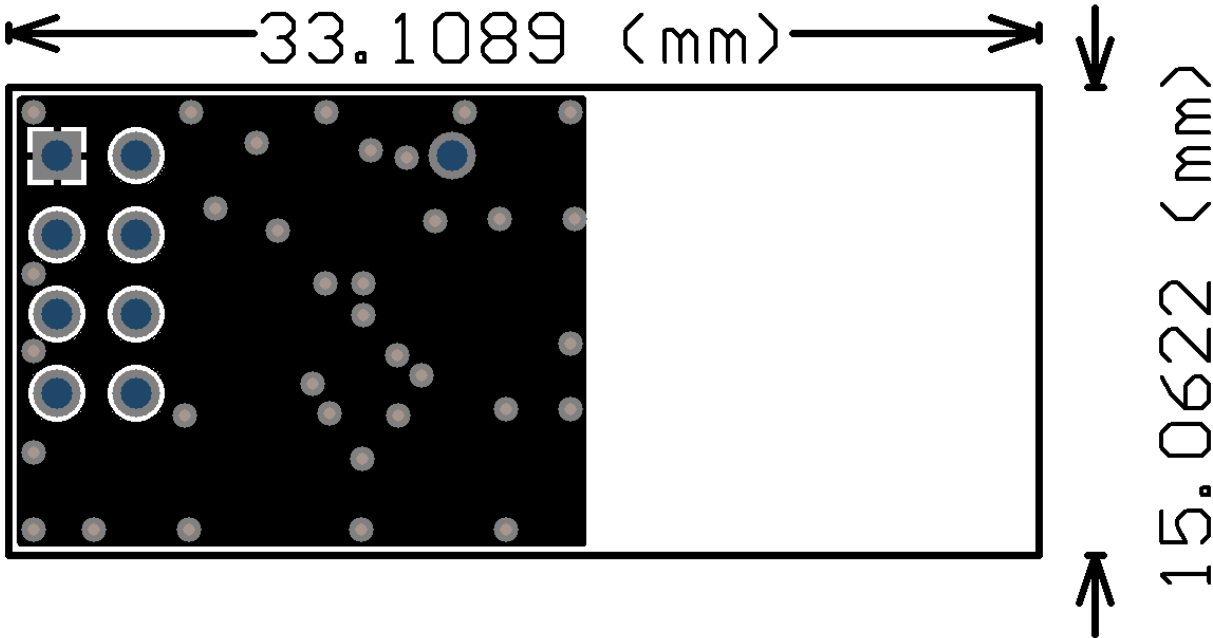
Bottom layer (nRF24L01+ RF layout with single ended connection to PCB antenna and 0402 size passive components
